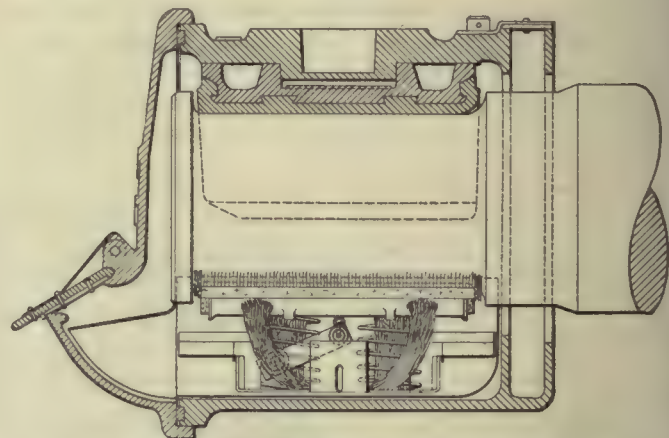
New-Type Journal Bearing Construction Used Under Freight Cars
